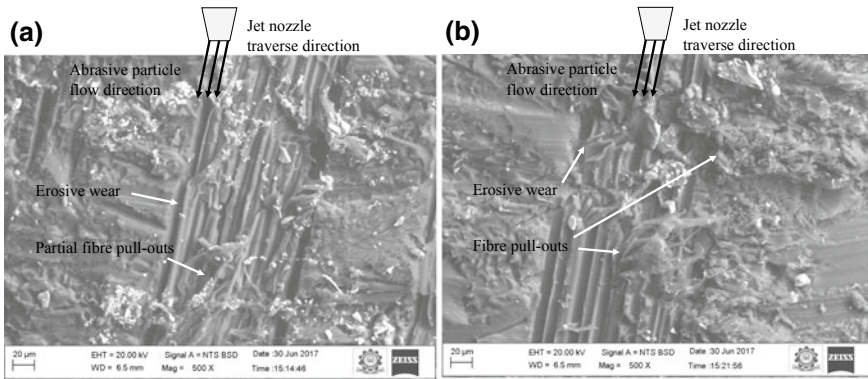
Surface morphology of the AWJ machined hybrid fibre composite with 7.5% filler (a) and 10% filler (b) material design
